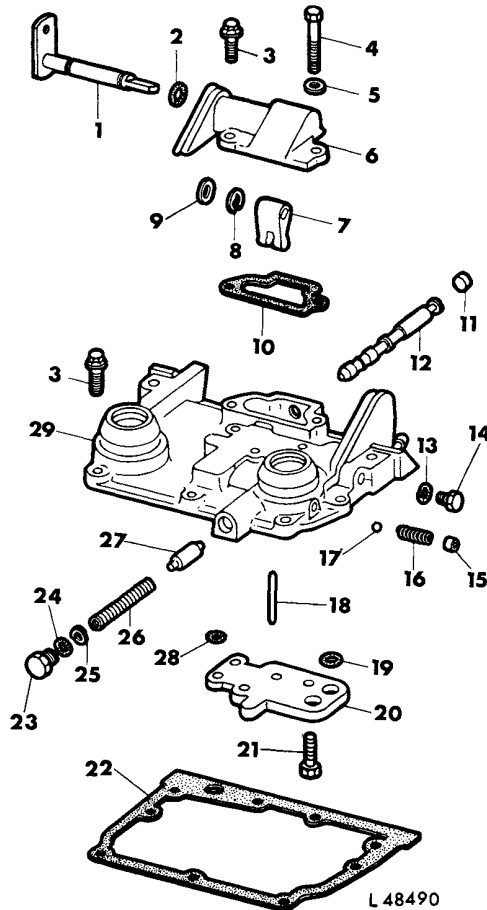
Transmission Shift Cover and Control Valve Assembly, Exploded View
